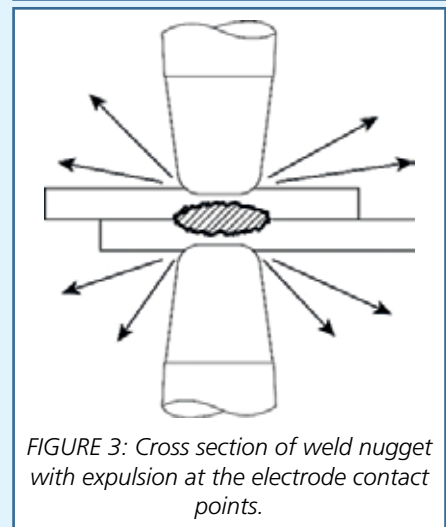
Cross section of weld nugget with expulsion at the electrode contact points.
